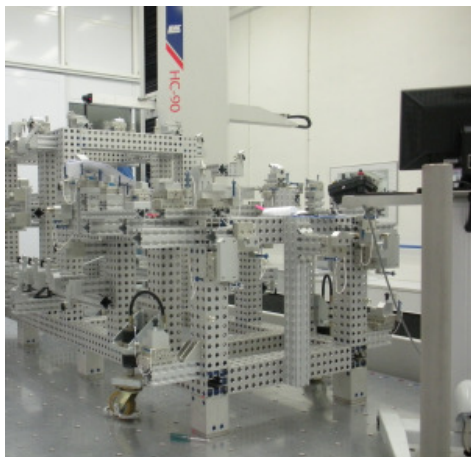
Window of Airbus A-380 according to predefined CAD data. Mounted on Alufix 25 standard components, no special machining required
